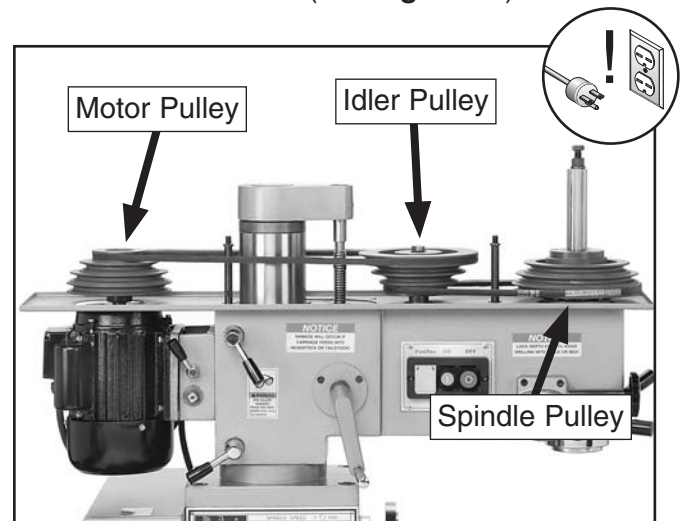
Mill drive system cover removed exposing V-belts and pulleys.
